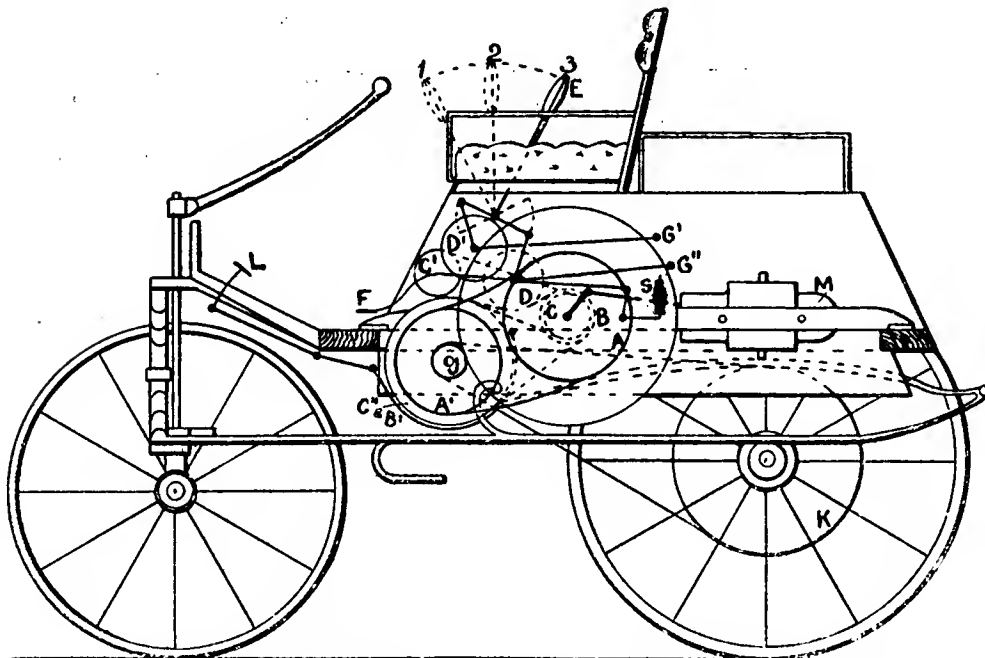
PETTER, HILL, AND BOLL—SECTIONAL ELEVATION.
